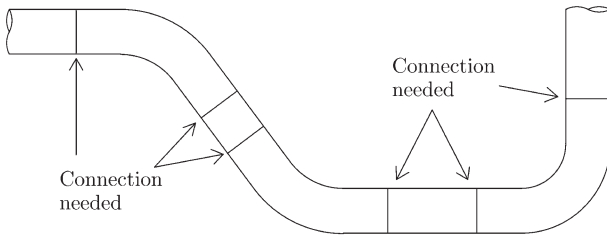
A non-metallic pipe has to be composed by bends and straight parts which are manufactured separately. Fittings or similar are needed to hold these parts together.
